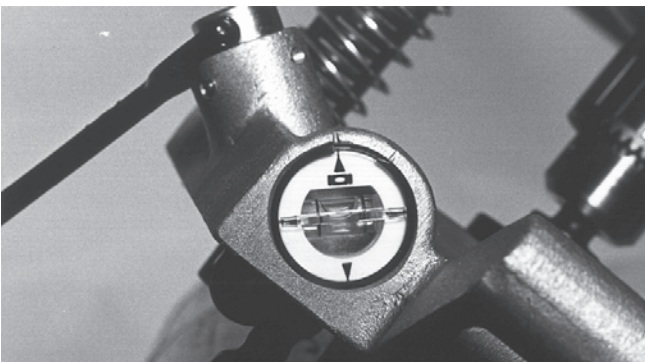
HC-450 Hole Cutting Tool Level Vial
